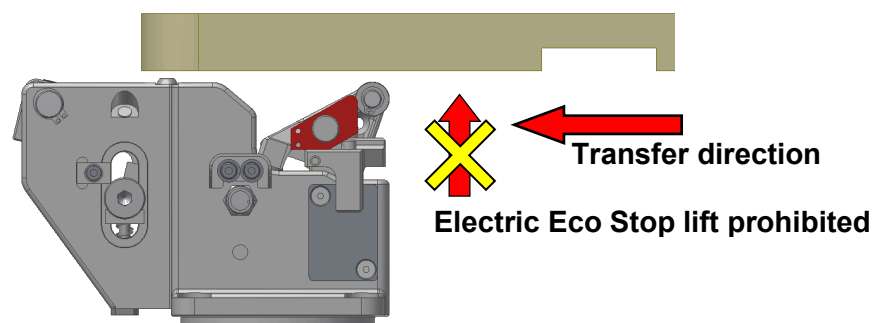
Typical state of Eco Electric Stop with the Mechanical Stop when the workpiece passes above it
